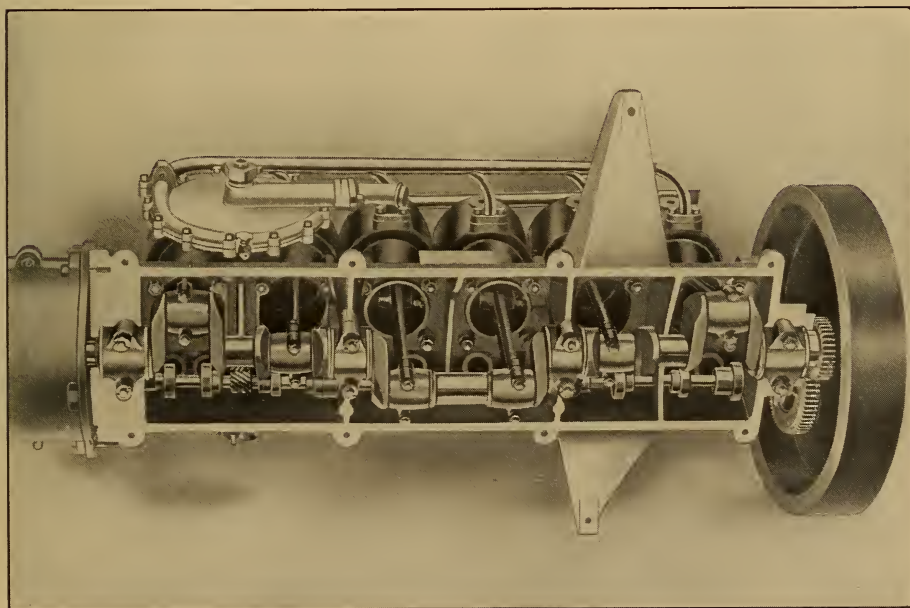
BOTTOM VIEW OF STEVENS-DURYEA SIX-CYLINDER MOTOR, WITH OIL PAN REMOVED, SHOWING CRANK SHAFT
